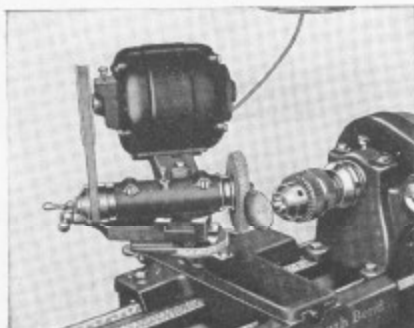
Refacing a Valve in the Lathe. Grinder Operates from an Electric Lamp Socket.
